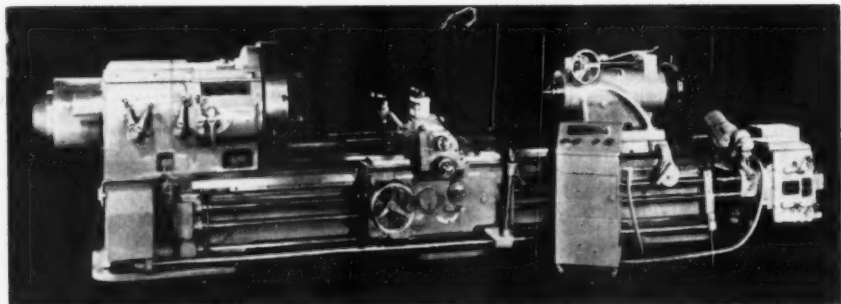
The Monarch 32" lathe for turning steel mill rolls. The lathe is equipped with Monarch-Keeler electrical contouring controls. It will be built in two sizes, with production already started on the smaller, or 32" machine. The 60" machine, designed to handle the largest rolls used in the steel industry, will be put into production later in the year.
